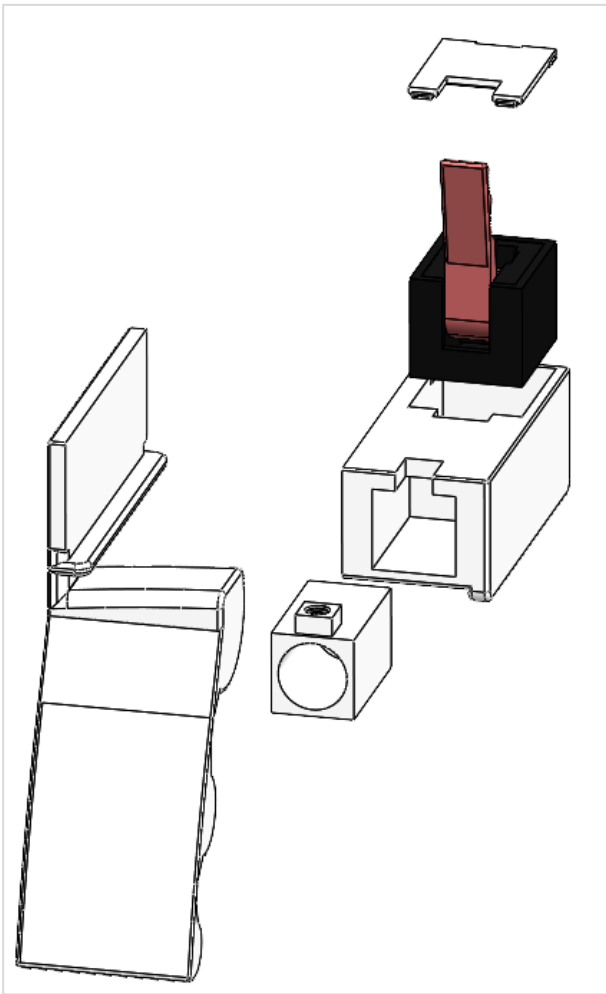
Exploded View of the Separate Parts from the Shoulder Support
